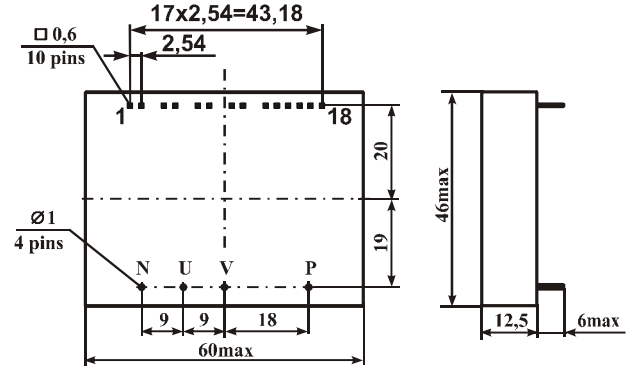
Overall drawing of modules M13B-1-6-PP4
